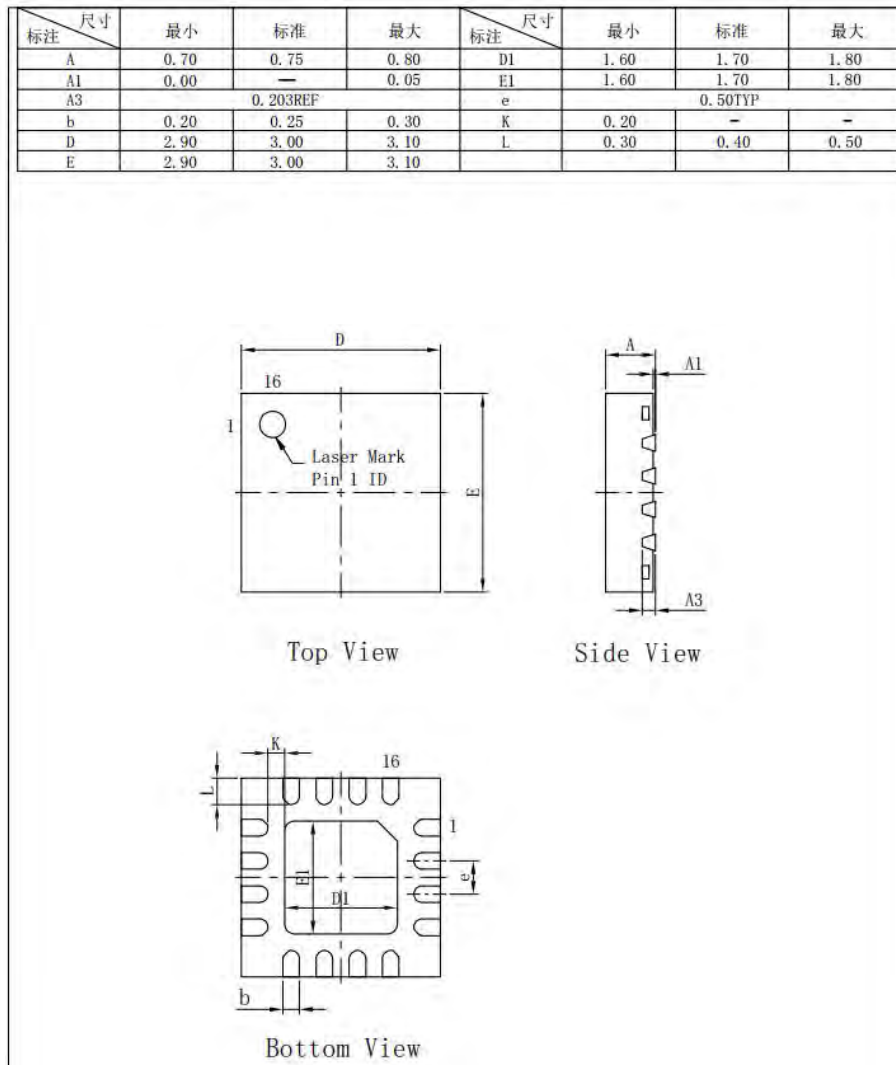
MH1701 QFN16 3mm*3mm Packaging Dimension
